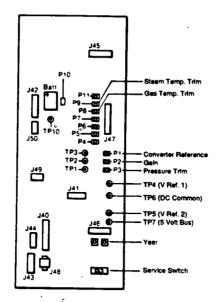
PRINTCON PC BOARD TEST POINT AND POTENTIOMETER LOCATIONS.
